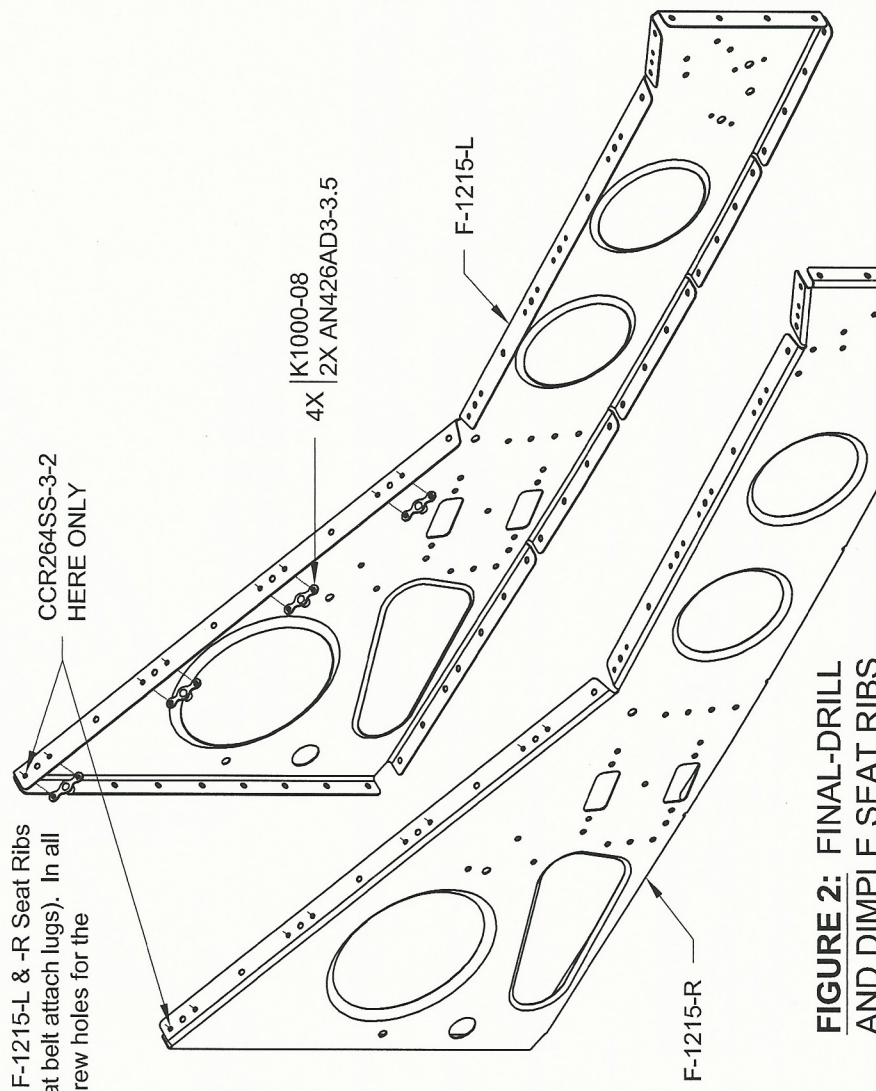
FINAL-DRILL AND DIMPLE SEAT RIBS
